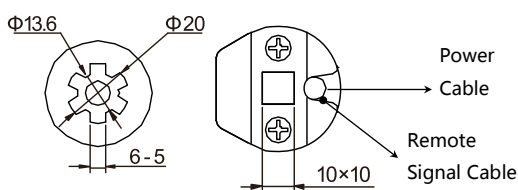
Dimensions - Motor (inner tube) Bottom View (Unit: mm)
